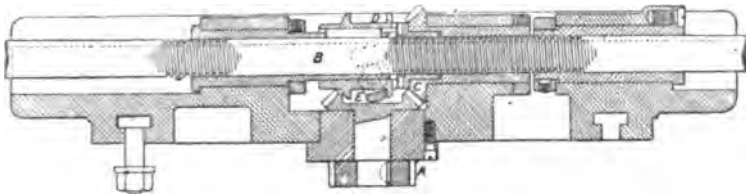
Longitudinal Section through Table Screw. Le Blond Machine.
